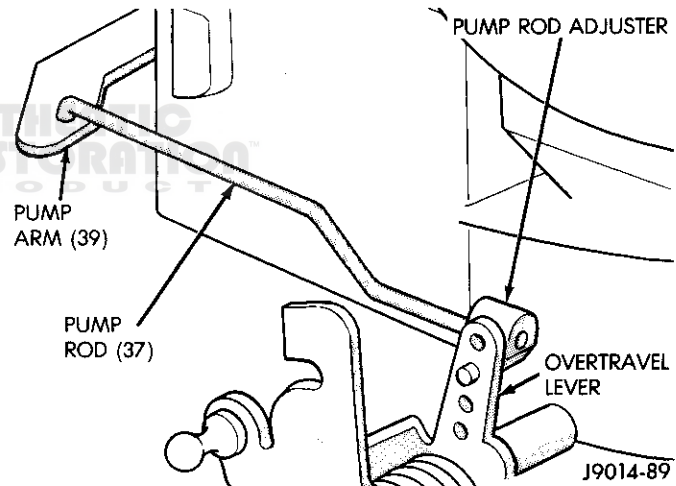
Accelerator Pump Rod and Overtravel Lever
